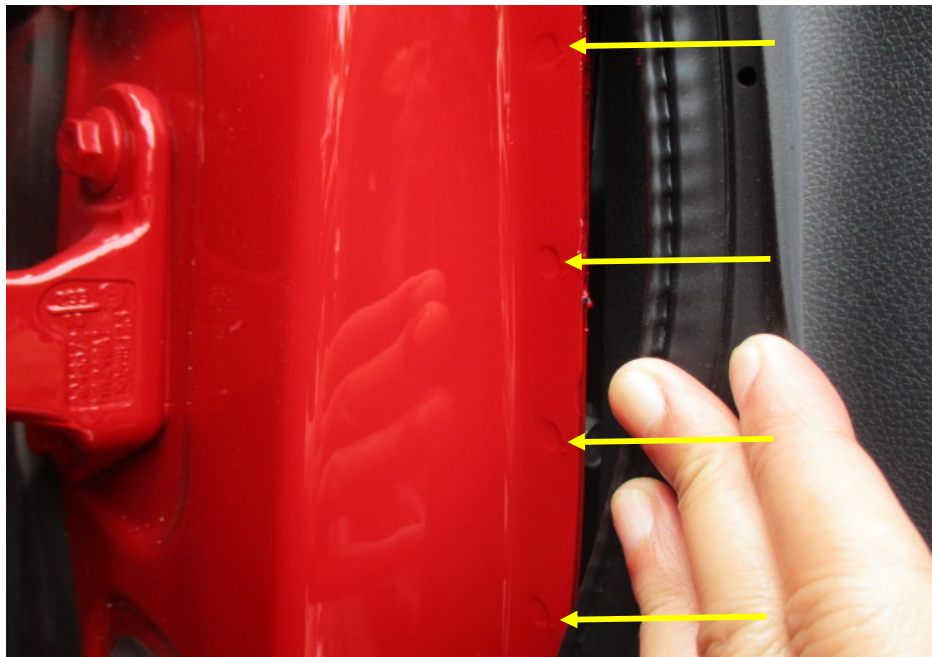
shows the left "A" pillar of the Motor Car. I did not find any weld marks other than original spot weld marks (arrowed) on the non-detachable body panels of the Motor Car, indicating that there was no re-welding works carried out. In general, I had found all the non-detachable body panels of the Motor Car to be originally fitted.
